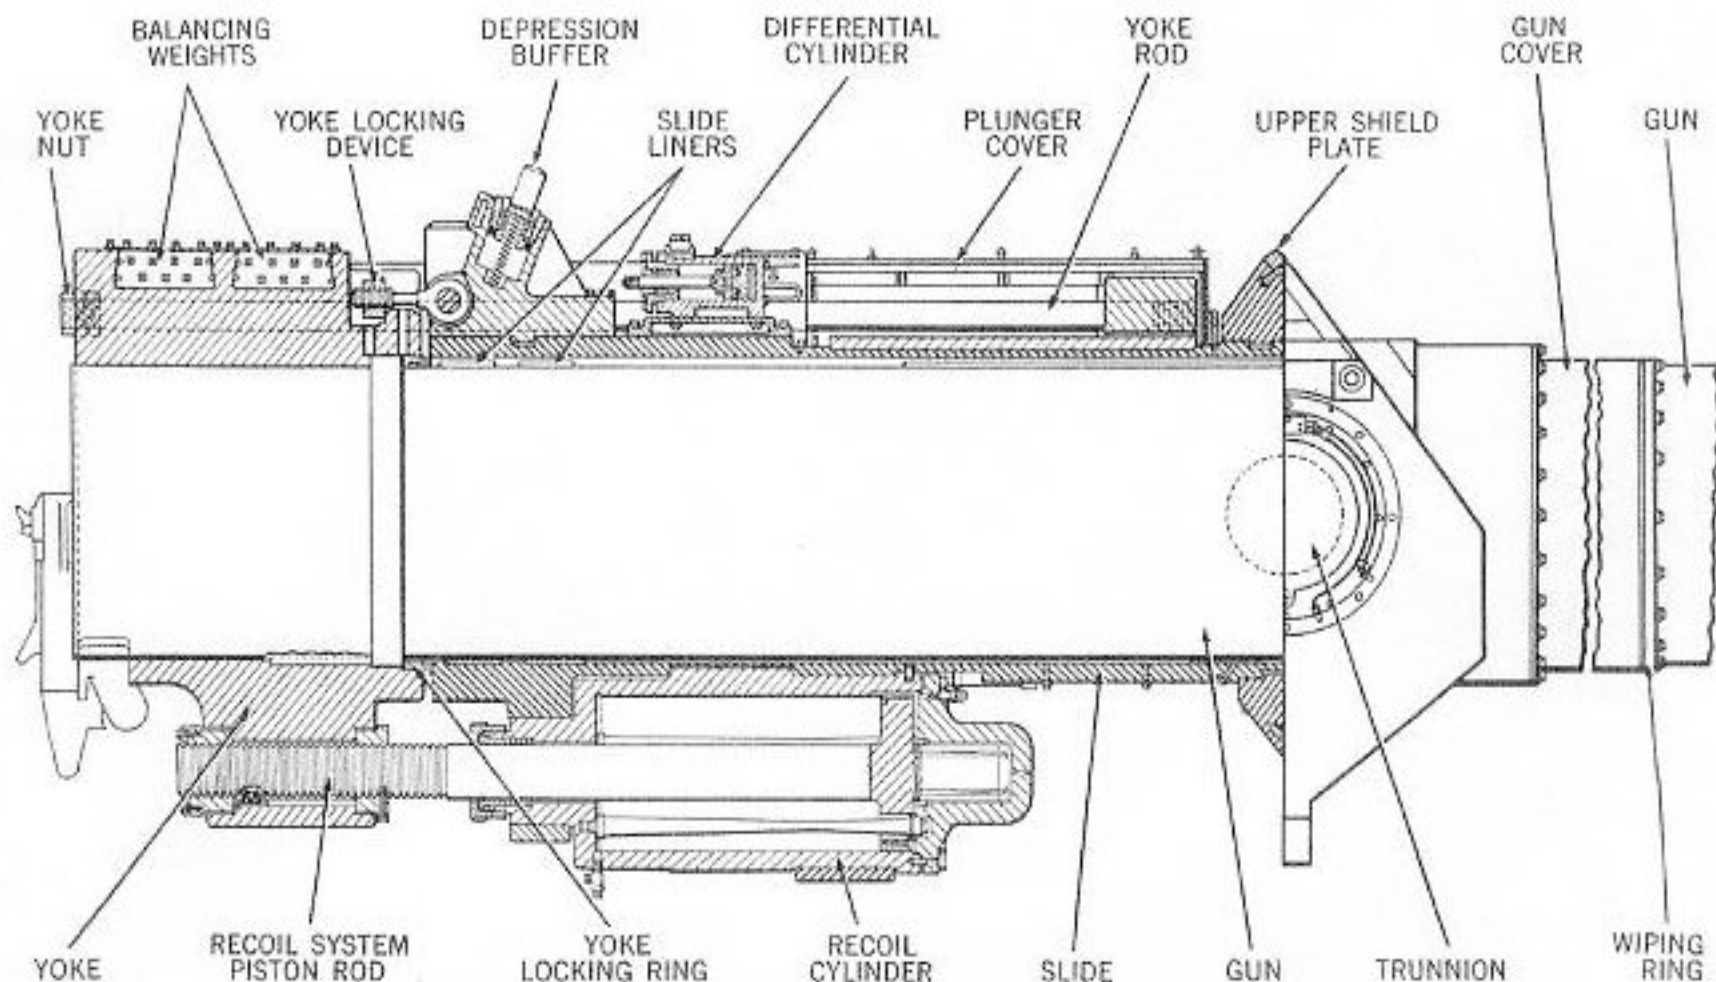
16-inch Gun Mk 7 Mod 0 and Slide Mk 6 Mod 0, General Arrangement, Sectional View
